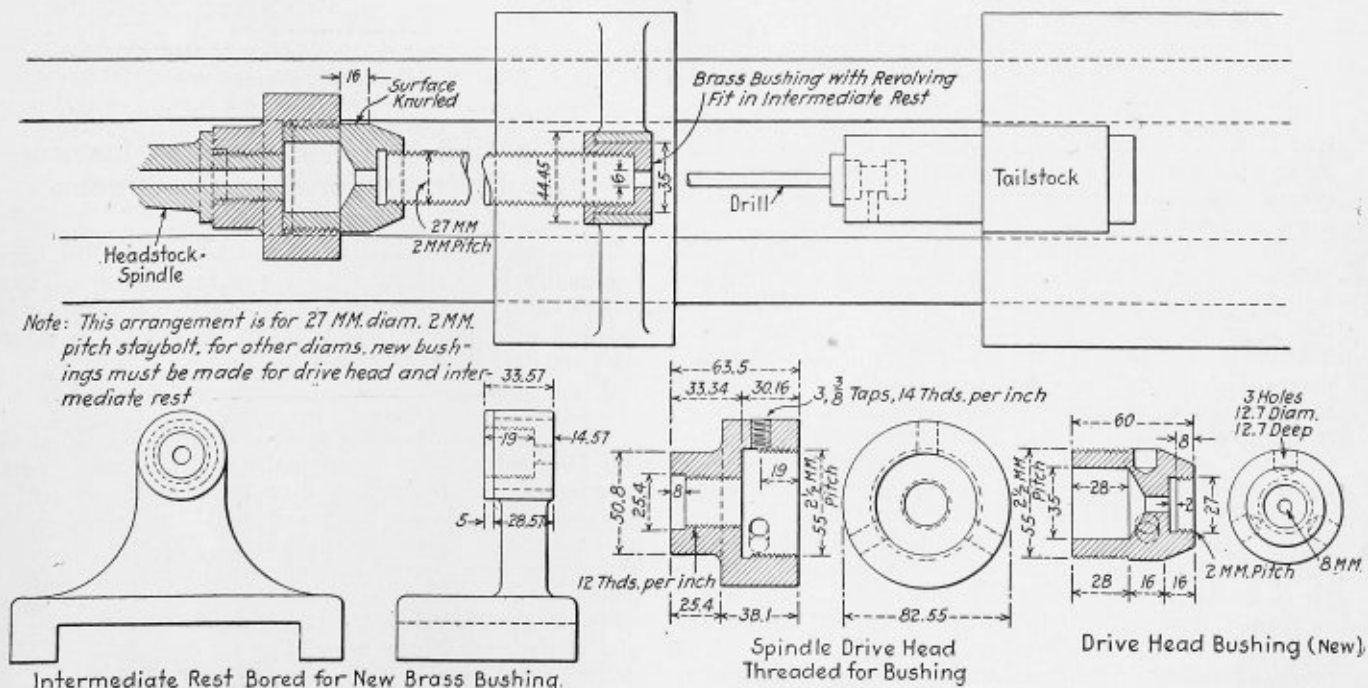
Details Involved in Converting Gun-Barrel Drilling Machine to Drill Telltale Holes in Staybolts
